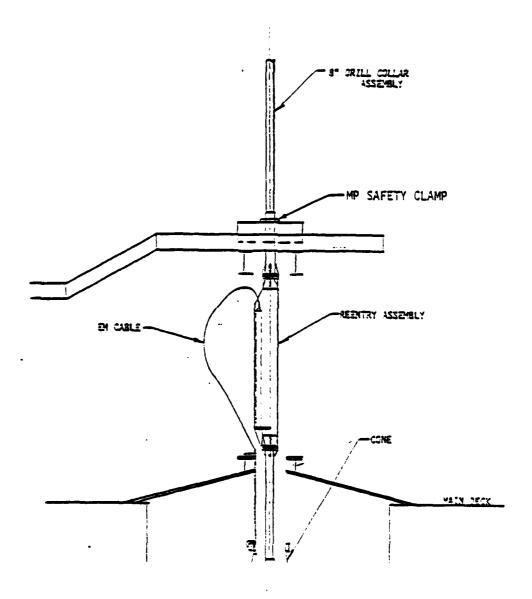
MAKE-UP LOWER REENTRY ASSEMBLY
